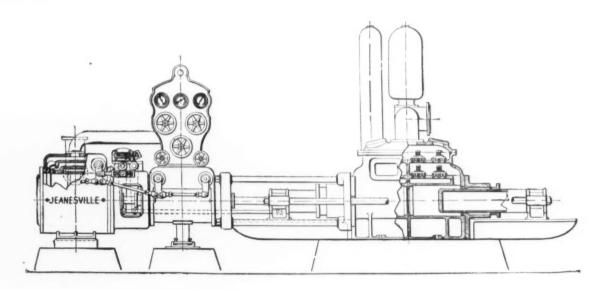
Longitudinal Sectional Elevation of Pump.
